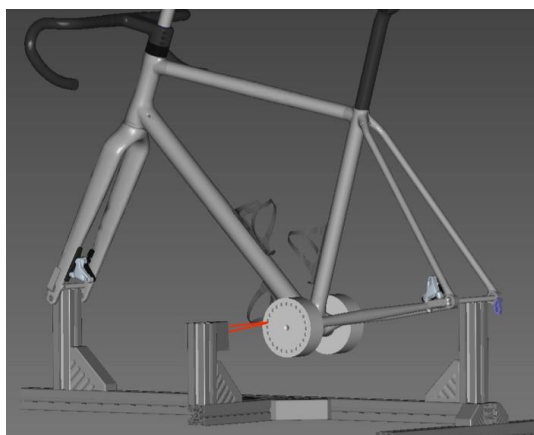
Suggested design for a test jig to measure PUT in bicycle assemblies
